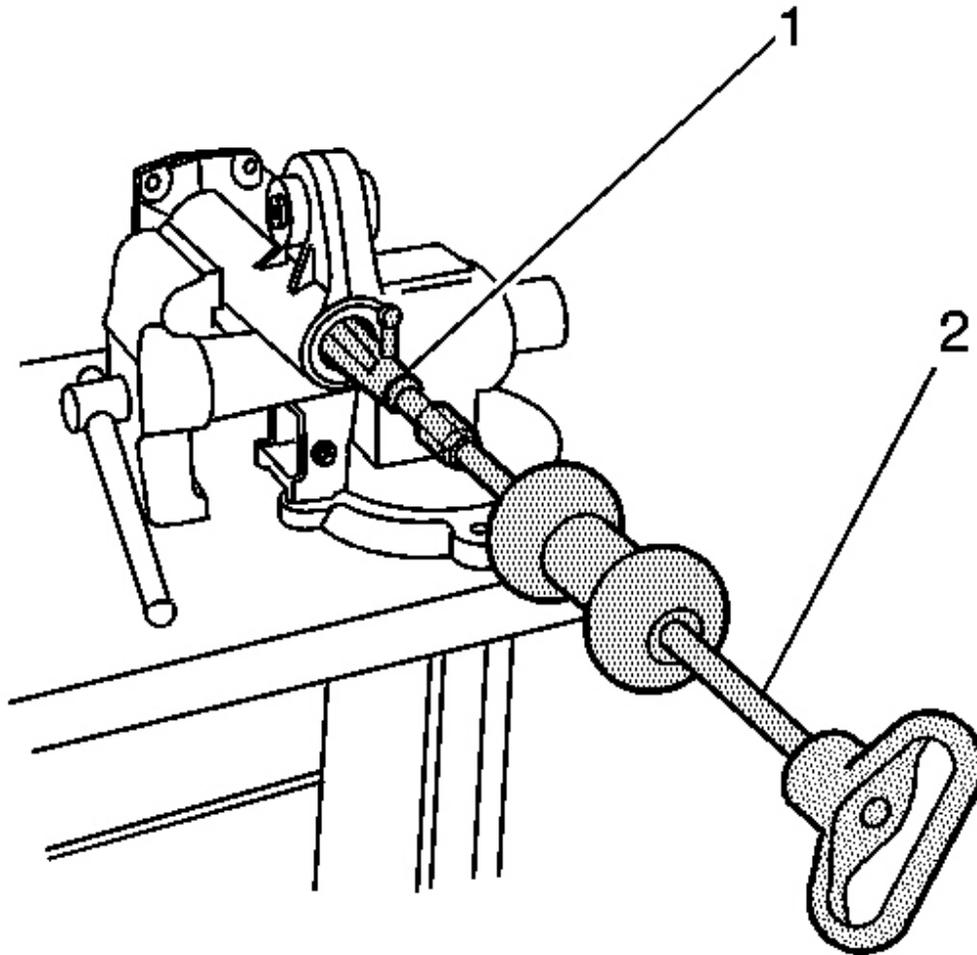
Installing J 29369-02 Behind Inner Axle Shaft Seal
